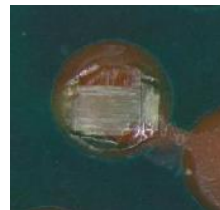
Wire pull failing at the pad metallization to laminate layer, an indicator of a strong solder to pad interface.
